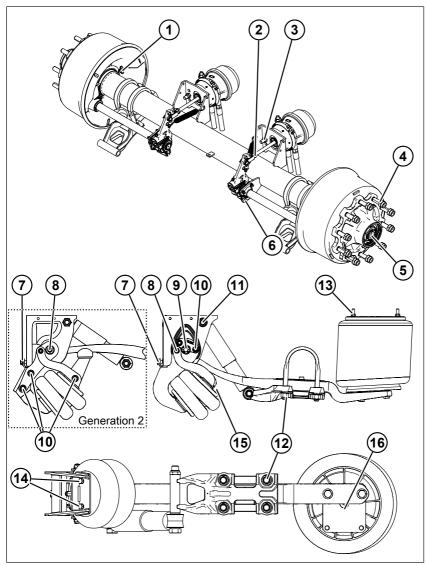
Overview of testing and tightening torques (bottom air spring link) Perform the following maintenance work:
